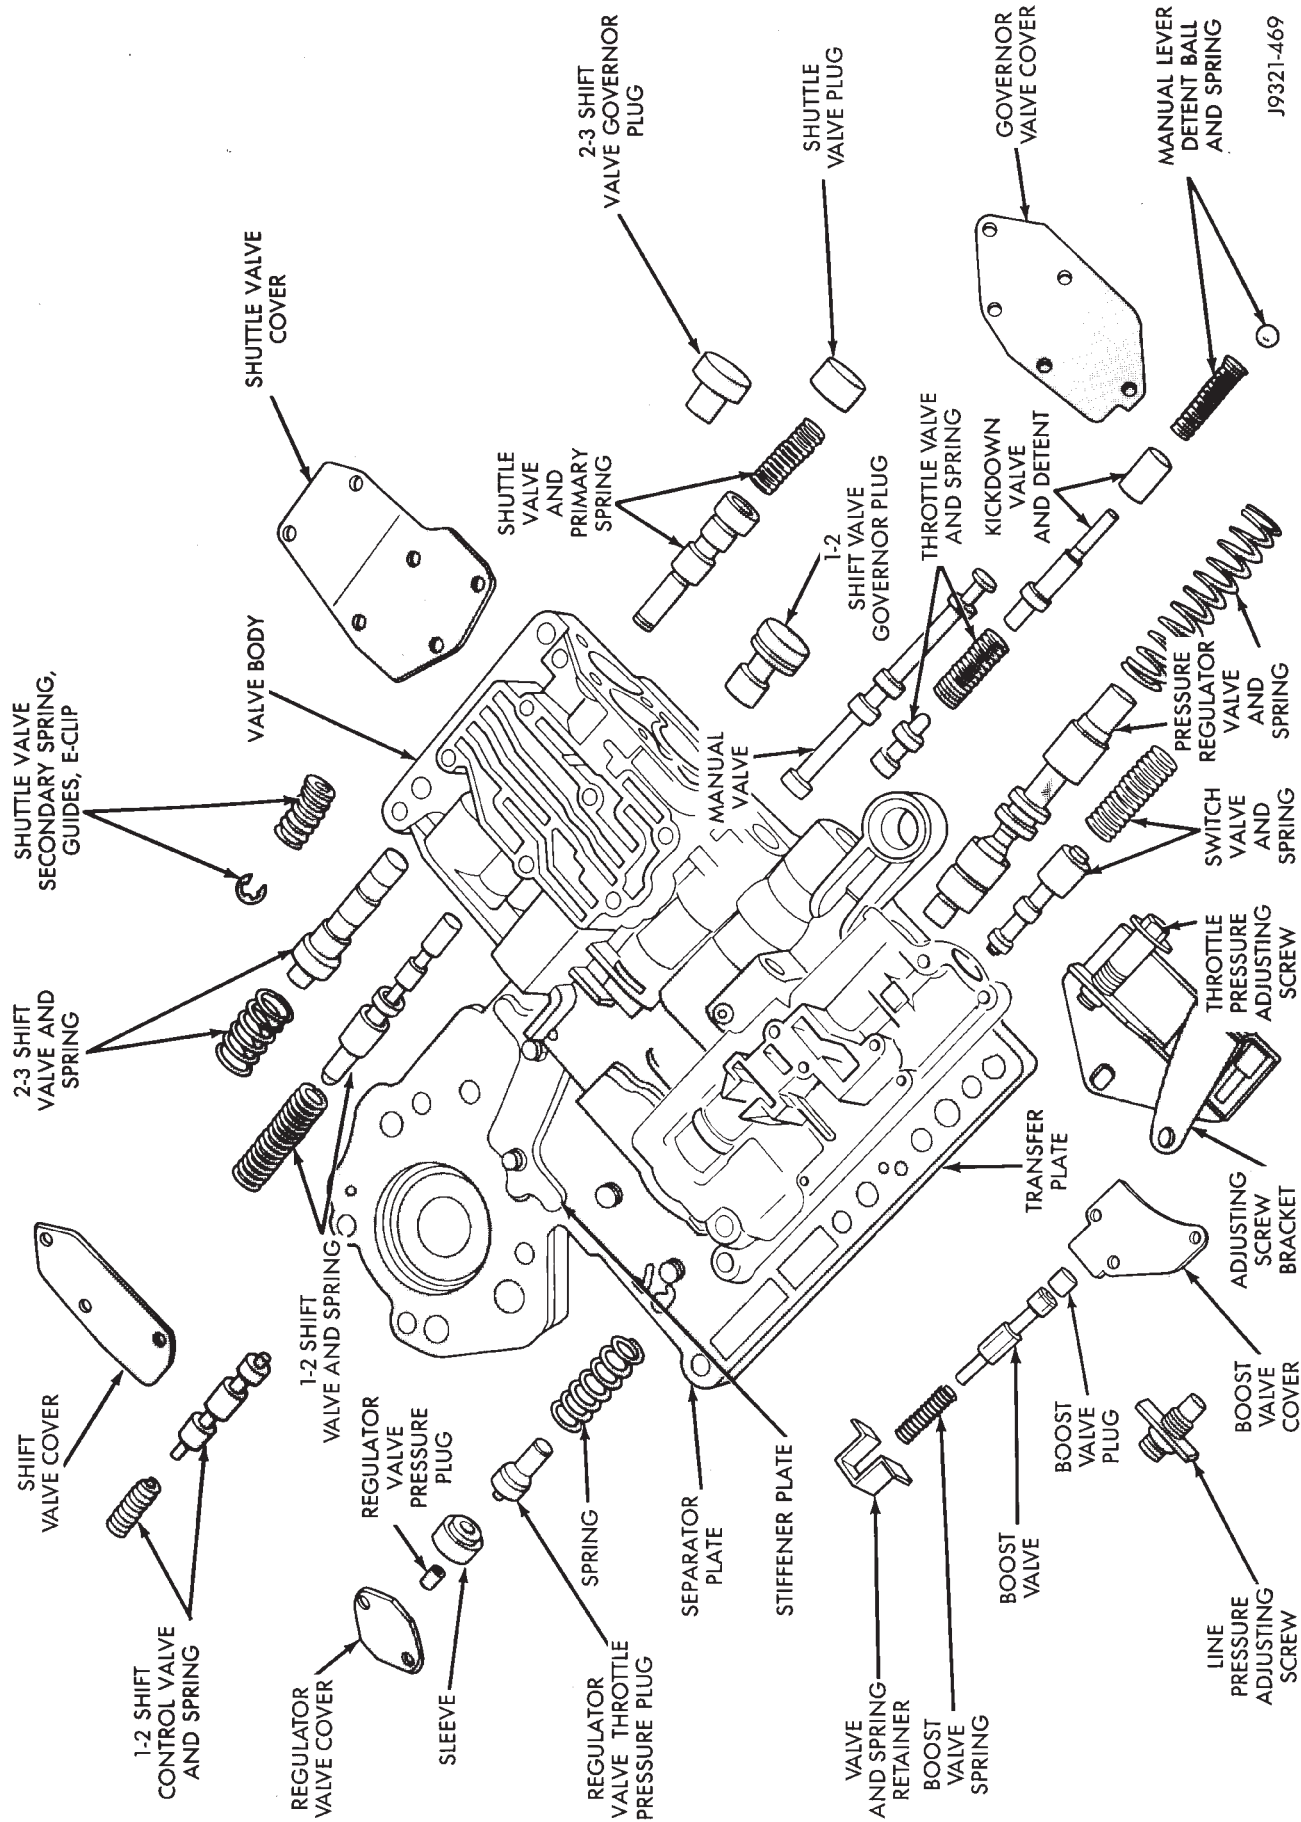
Upper Housing Valves, Plug, Springs And Brackets
